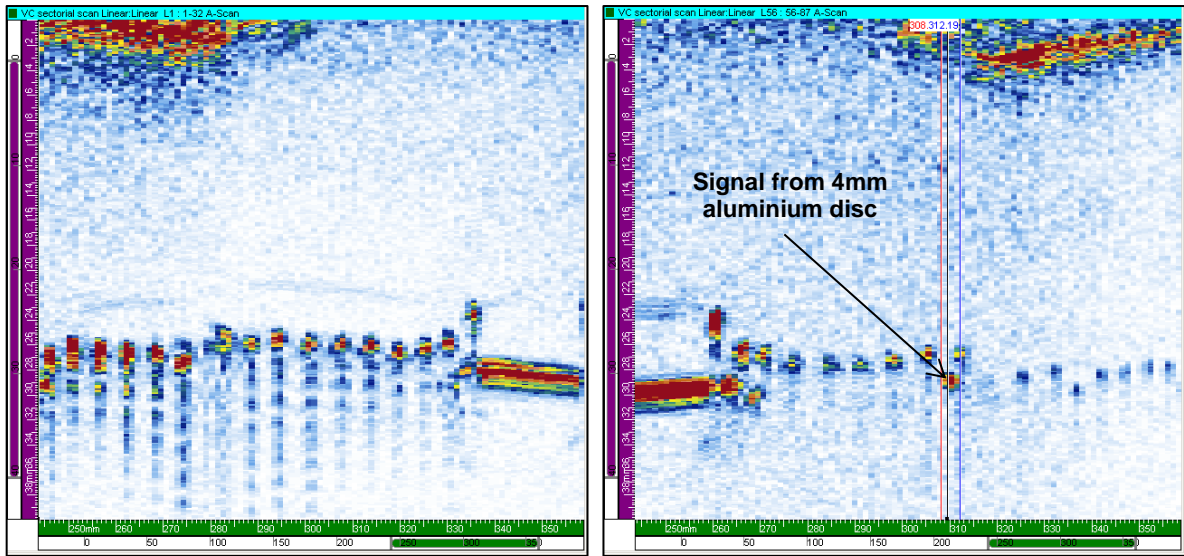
B-scan images of electrofusion welds in 450mm PE pipes: unflawed weld (left), and weld containing a 4mm aluminium disc (right).
